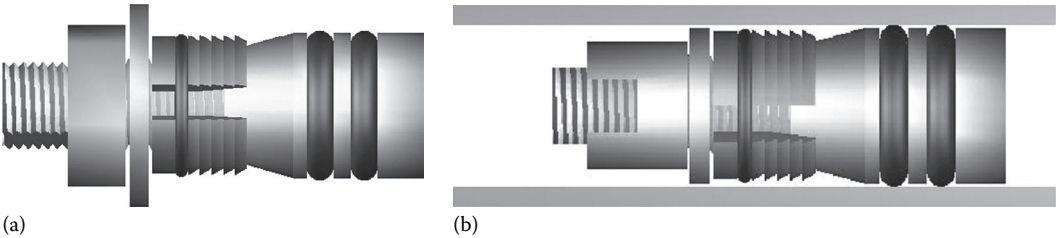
Mechanical seal plug. (a) Schematic and (b) plug installed in a tube. (Courtesy of Powerfect, Brick, NJ.)
